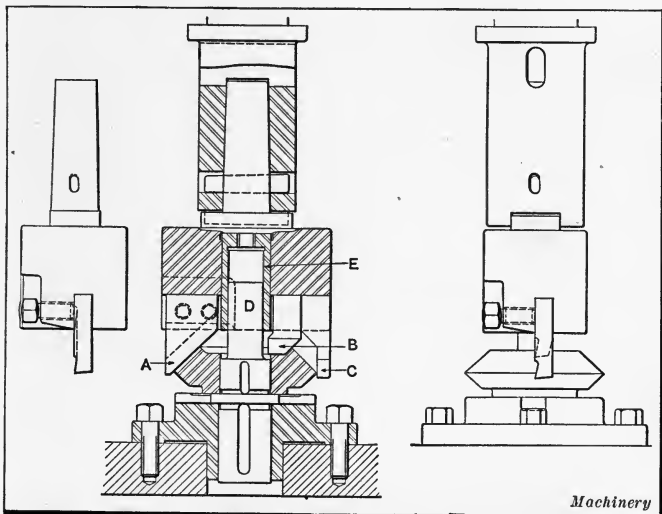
Sectional View of Tool and Work-holding Fixture shown in Fig. 15
